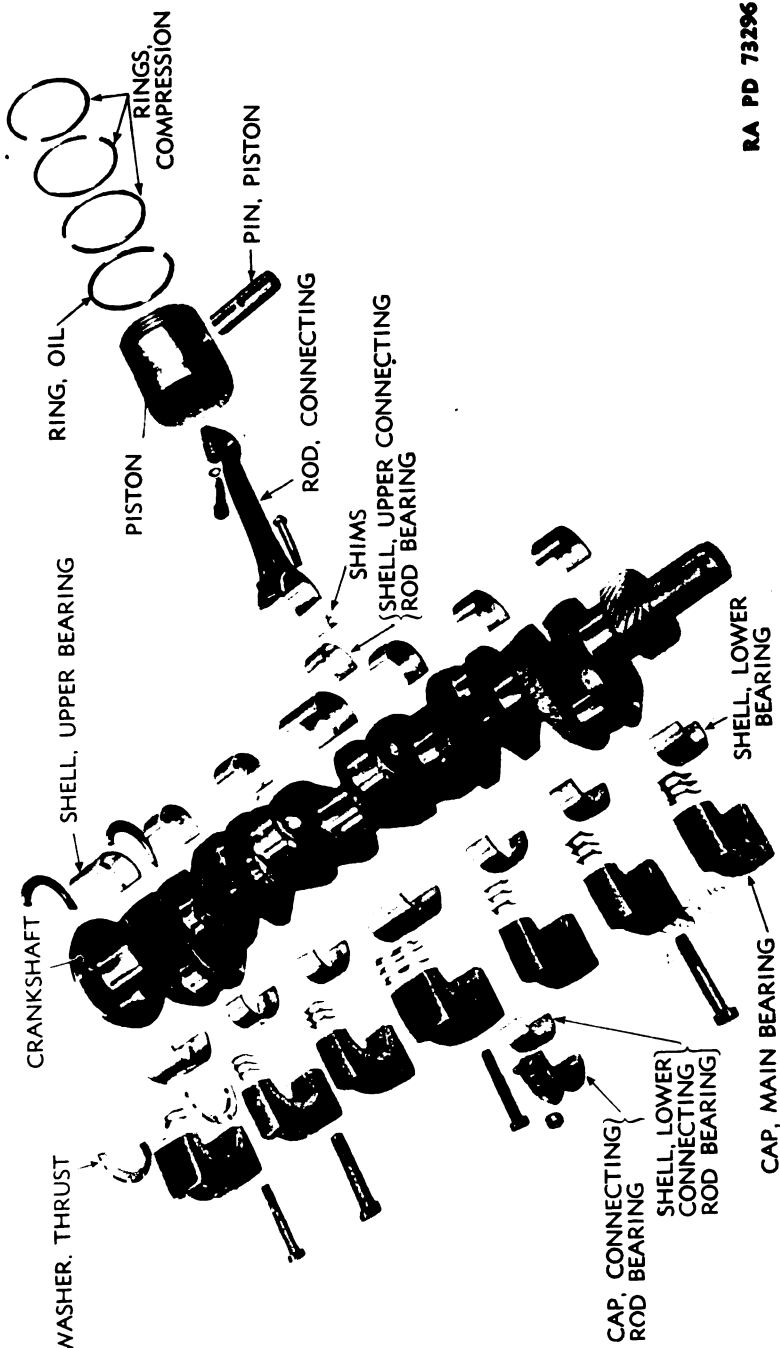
Crankshaft, Piston and Bearings — Exploded View
